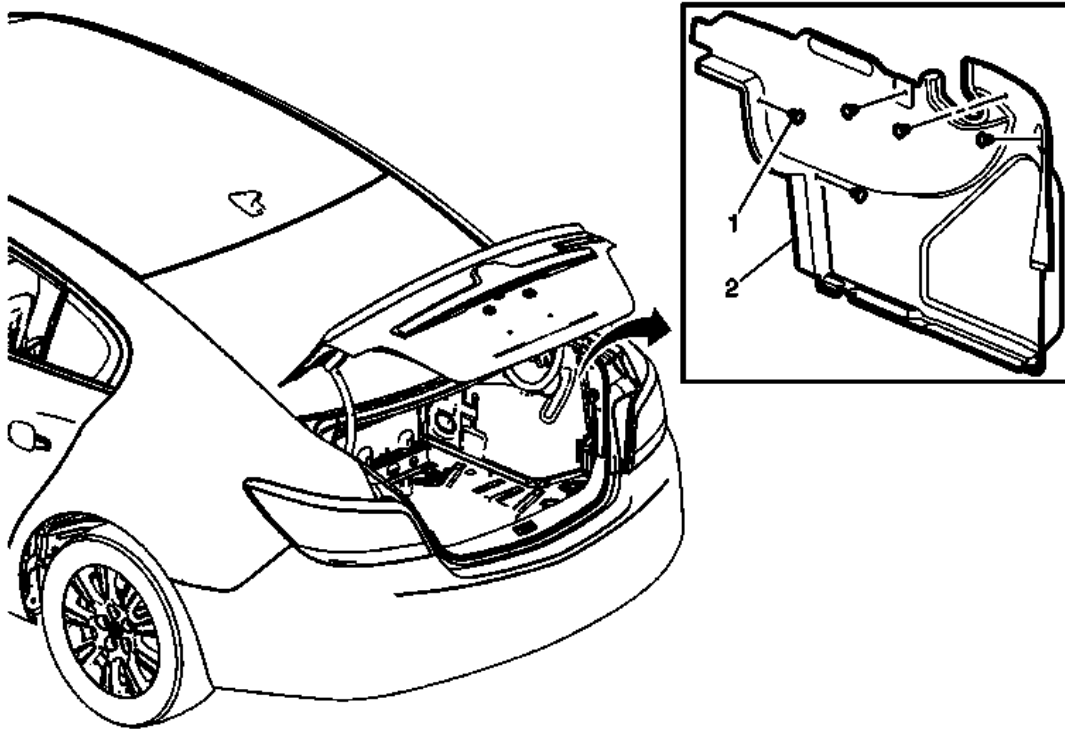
Rear Compartment Side Trim Panel (HP6, Right Side)
